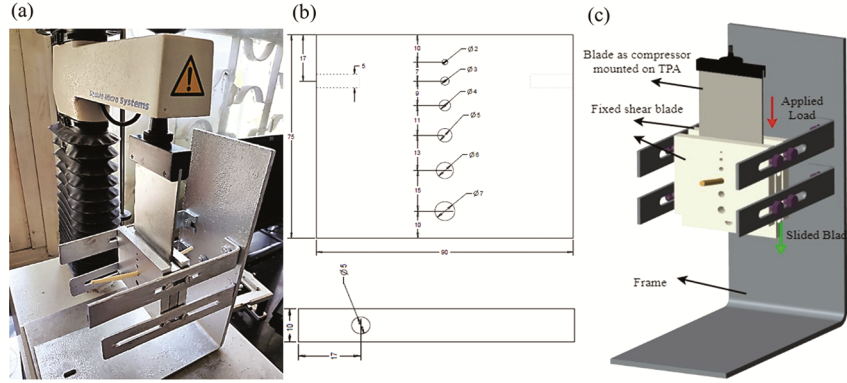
Shear strength measured by (a) shear plate test setup, (b) plate dimensions and (c) labelled cad model setup
